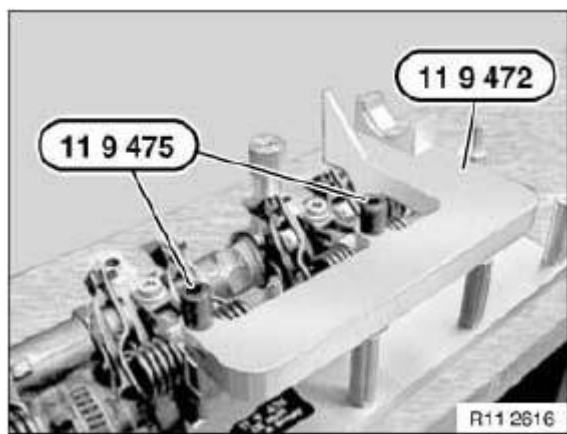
Identifying Special Tools (11 9 475) And (11 9 472)
